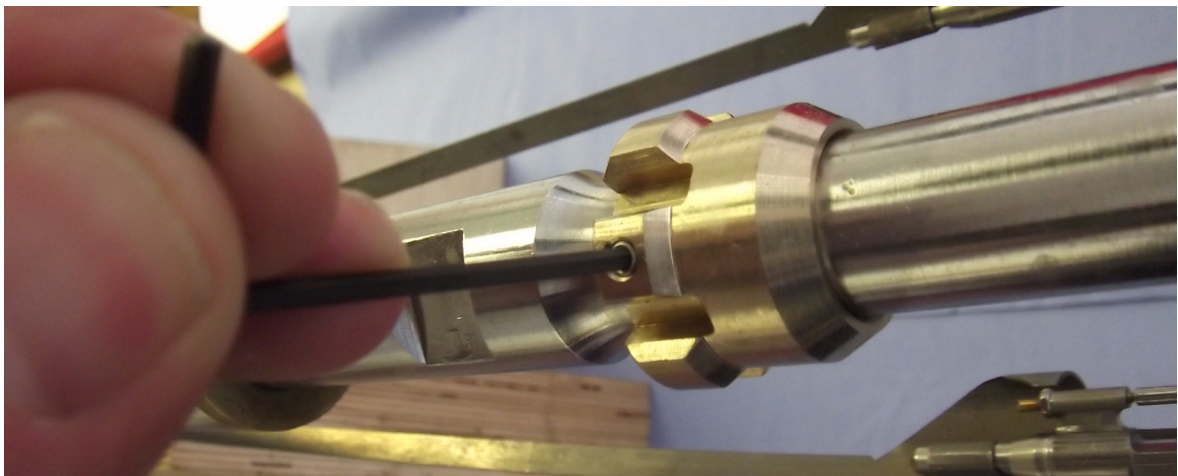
Fit Grub Screws into the Mounting Front Sensor Guide
